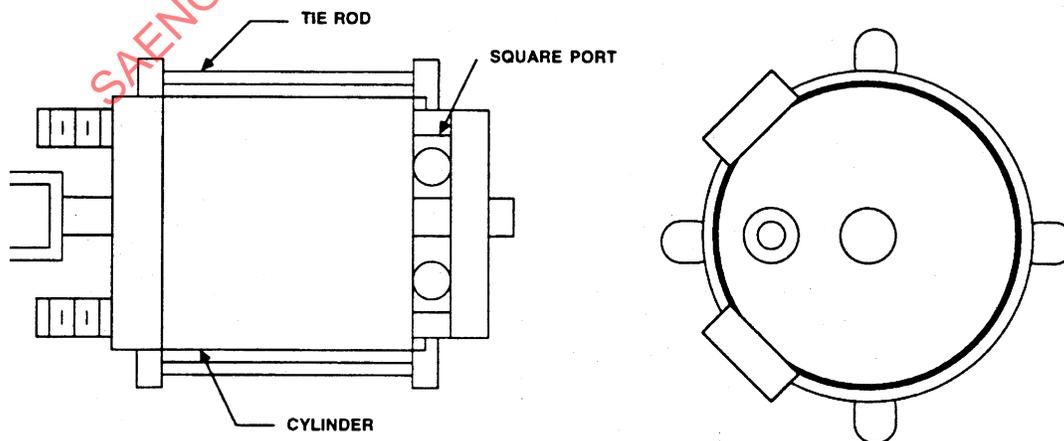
TIE ROD STYLE PISTON BRAKE CHAMBER
